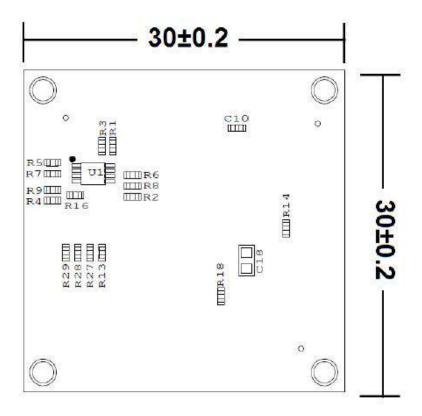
Rear View of e-CAM50_CUiMX8 Ixora Adaptor Board Mechanical Dimensions
